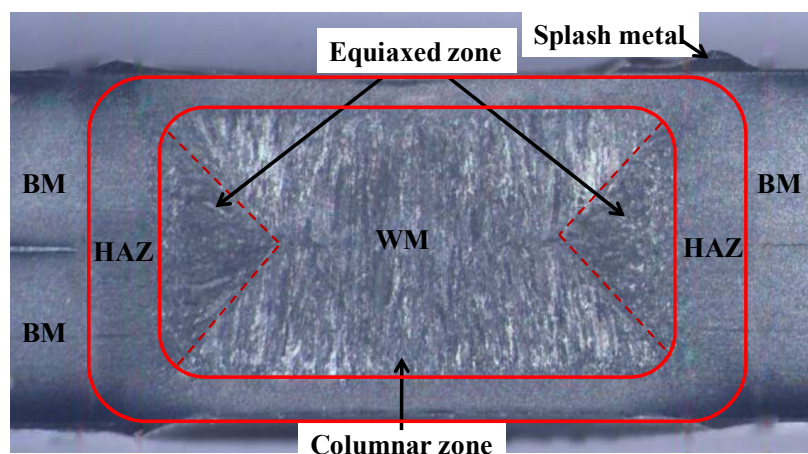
Macrostructure in transverse section of spot weld
